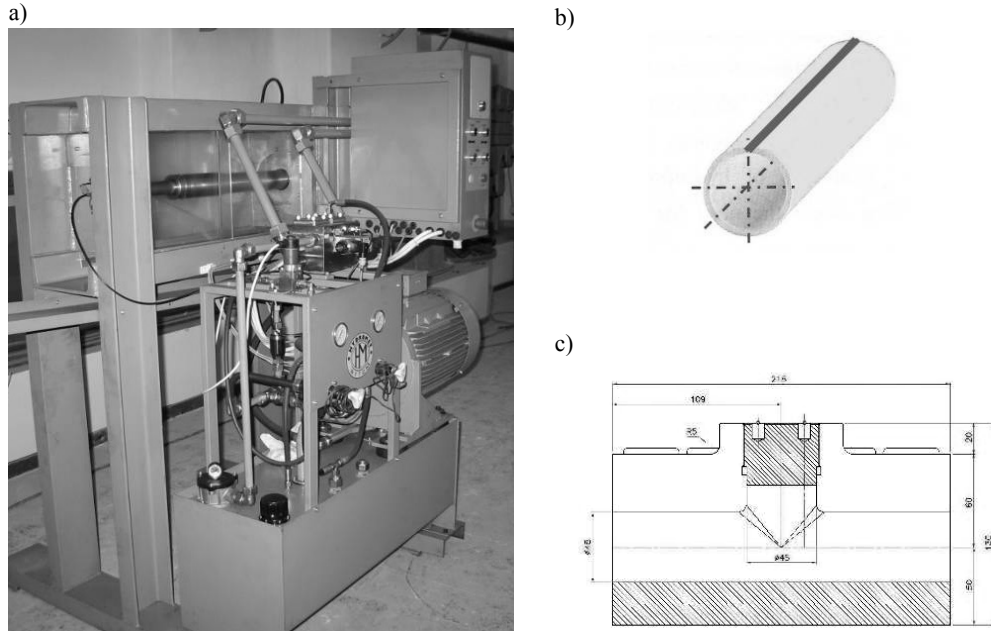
The photography of laboratory stand for laser welded tubes hydroforming (a); scheme of welded tube exemplary sample (b); scheme of devices for limited hydroforming of tubes
